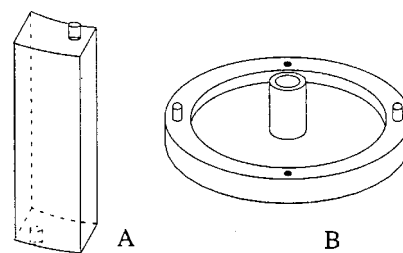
(A) Segment of ring electrode. Note the locating pins on the top and bottom. (B) Sketch of an endcap electrode showing the central tube, mounting rim, locating pins.
